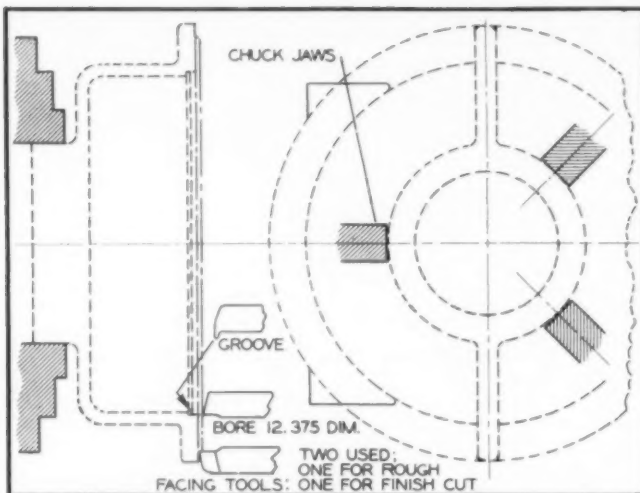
, showing the simple tooling for facing the flange, boring the 12.375 in. diameter and undercutting. The part is held in a universal chuck and the four tools used may be held in a tool post turret. This setup is for small-lot runs. For mass production, a fixture should be used with stops against the back of the circular flanges, also, the 12.375 in. dim. should be bored with a finishing tool held in a heavy cutter head with the bar running in a guide bushing.
